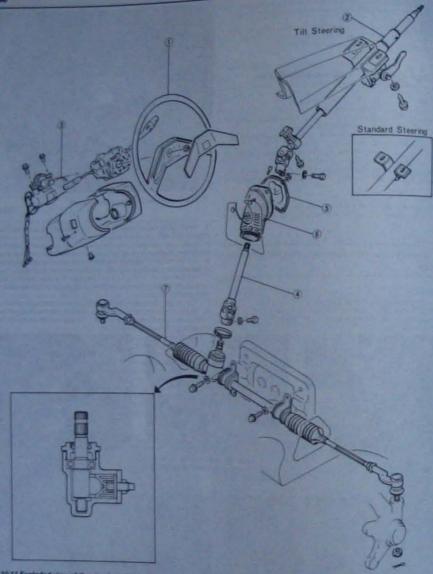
Exploded view of the steering wheel column and assembly - pre-September 1985 models shown (Secs. 16 to 21)
